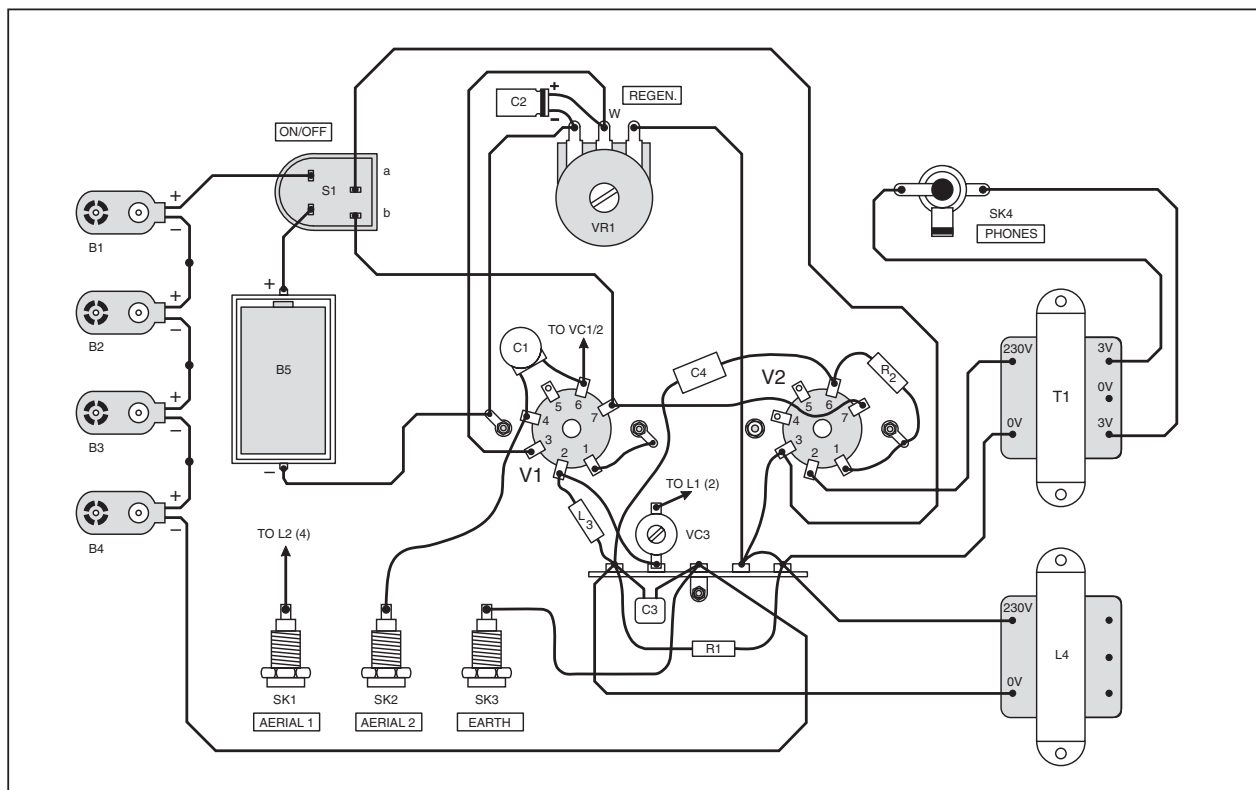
Interwiring details between the valve bases and underside components. The metal chassis forms the common "earth/0V" connection via the solder tags and centre mounting tag of the 5-way tagstrip. Pin 4 of valveholder V1 is used as an anchor point for C1 and socket SK2.
